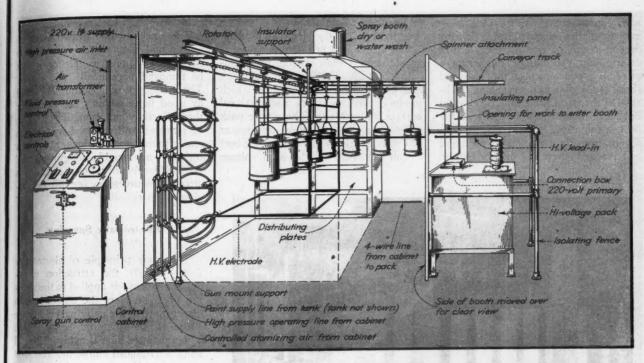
TYPICAL ELECTROSTATIC SPRAY design showing arrangement of equipment and electrical components of electrostatic attachment. Control cabin et and voltage pack are mounted outside spray-booth.
